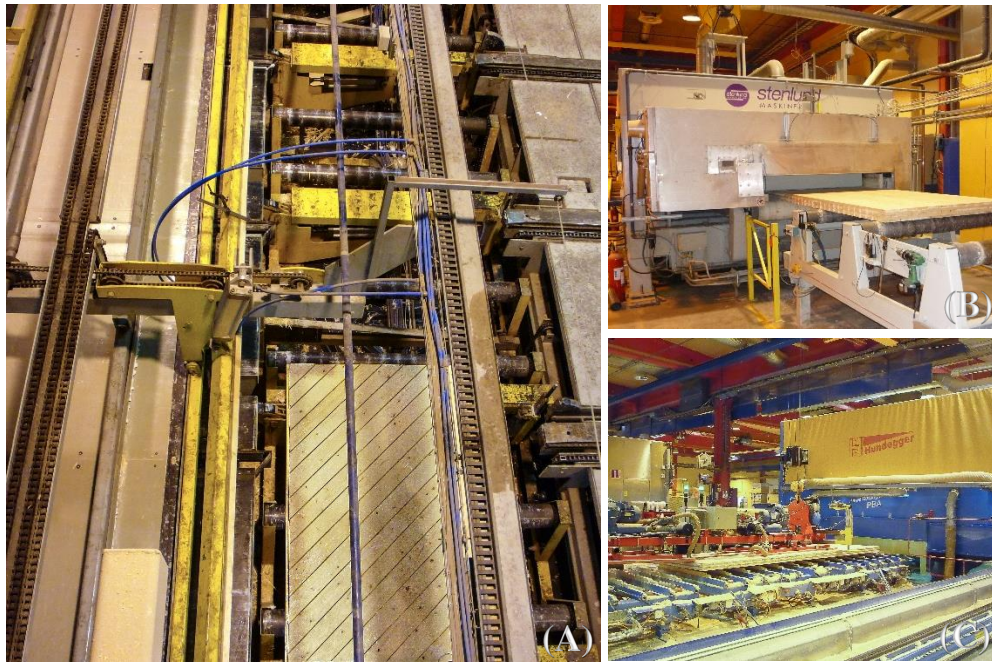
Industrial production of conventional CLT (90°) and modified CLT $\pm 45^\circ$ panels: (A) Arrangement of 45° layers; (B) HF press; and (C) CNC sizing
